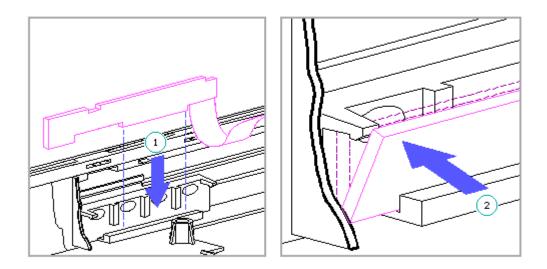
Replacing the LED Cable Assembly into the Bracket
